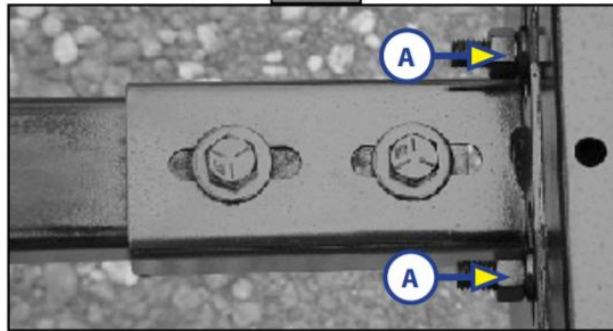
Room Bar mounting bracket - idler side. The drive side will not have adjustments on the guide rail.
